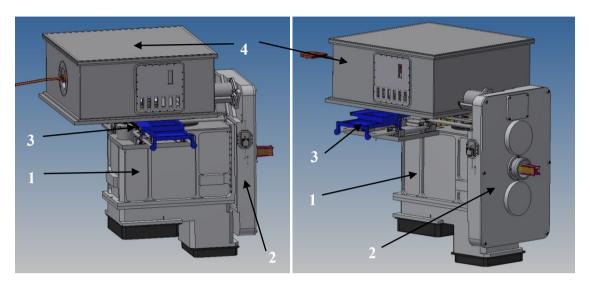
, Cold optic assembly; 1. Optic assembly structure, 2. Filter wheel assembly, 3. Slide system, 4. Detector environment
